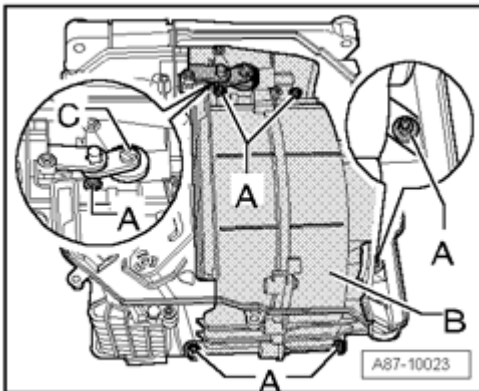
Identifying Bolts, Fresh Air Blower V2, And Connecting Elements
